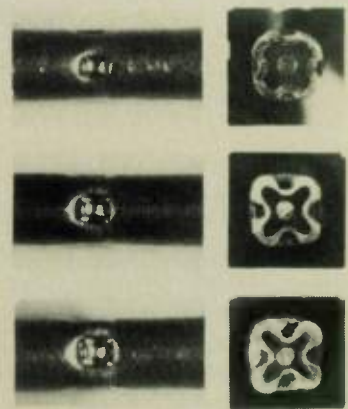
Light, medium and heavy crimps in 85 mil copper made with modified crimping tool.
